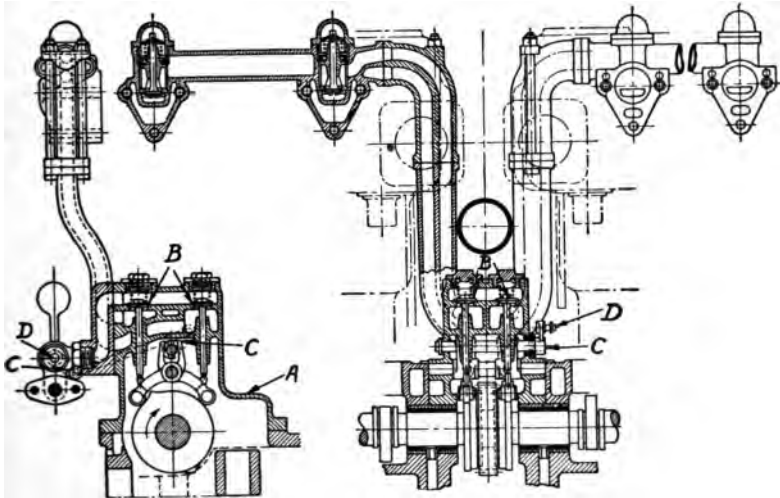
Details of Valves for Starting N.A.G. Engine by Compressed Air
